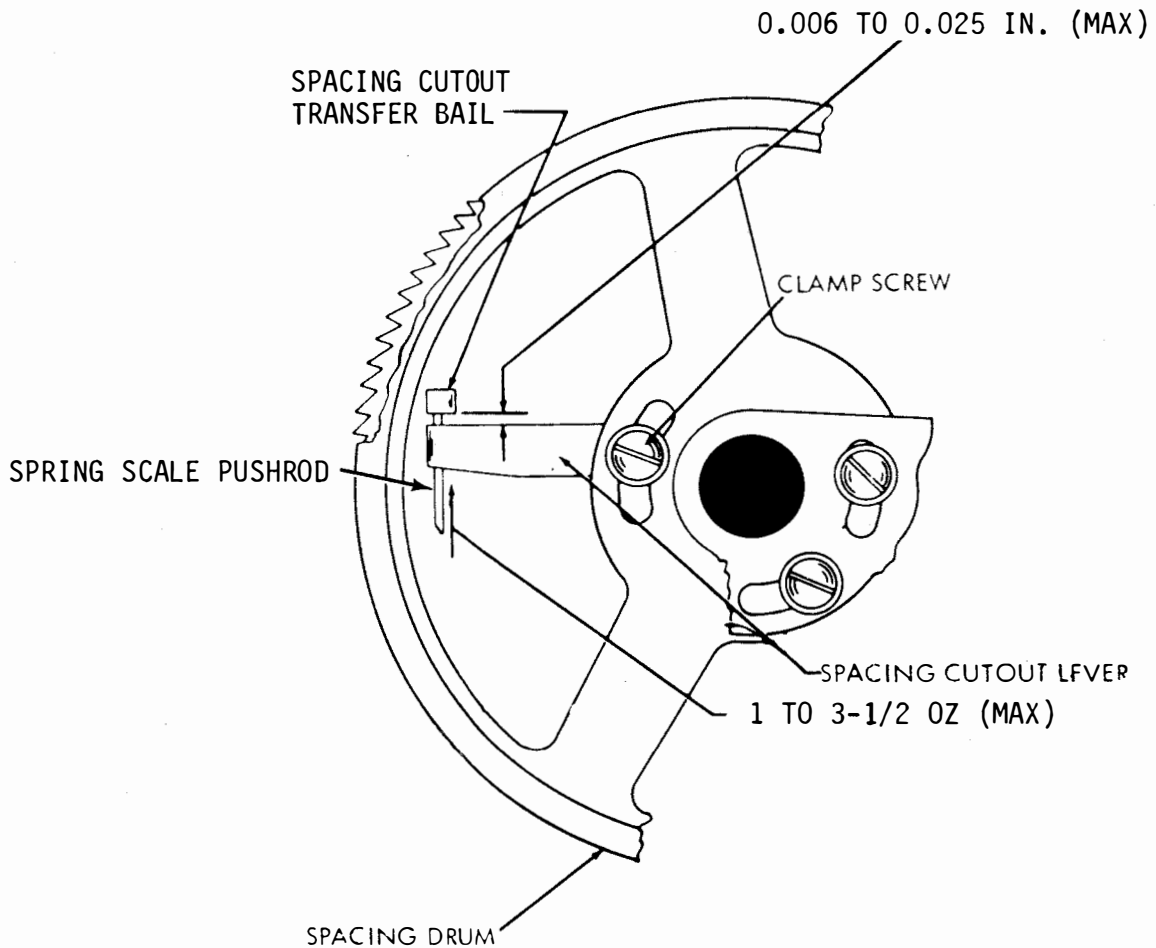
Right Margin and Spacing Cutout Transfer Bail Spring, Front View
